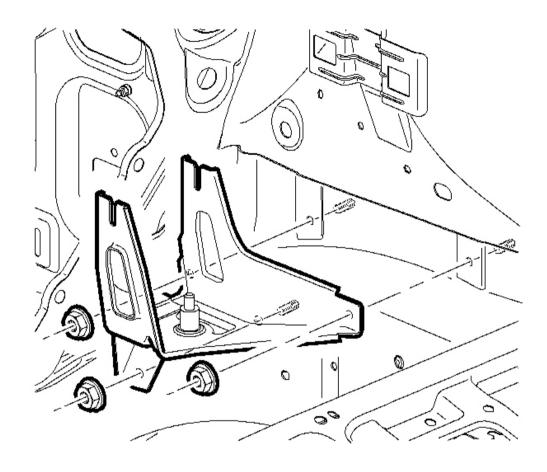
Removing/Installing Brake Modulator Valve Bracket Courtesy of GENERAL MOTORS CORP.
